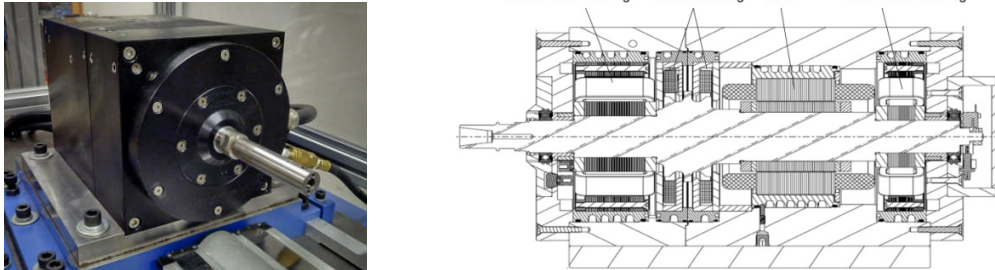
Photograph of AMB machining spindle (left) and cross section spindle of without tool holder (right)
